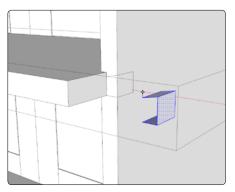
Open the side for editing and trace over the dovetail shape.
